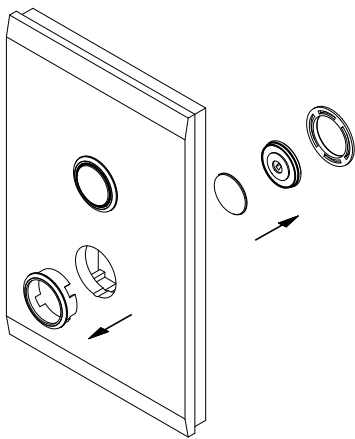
Remove existing switch, retaining clip, button and silver ring from wall plate
